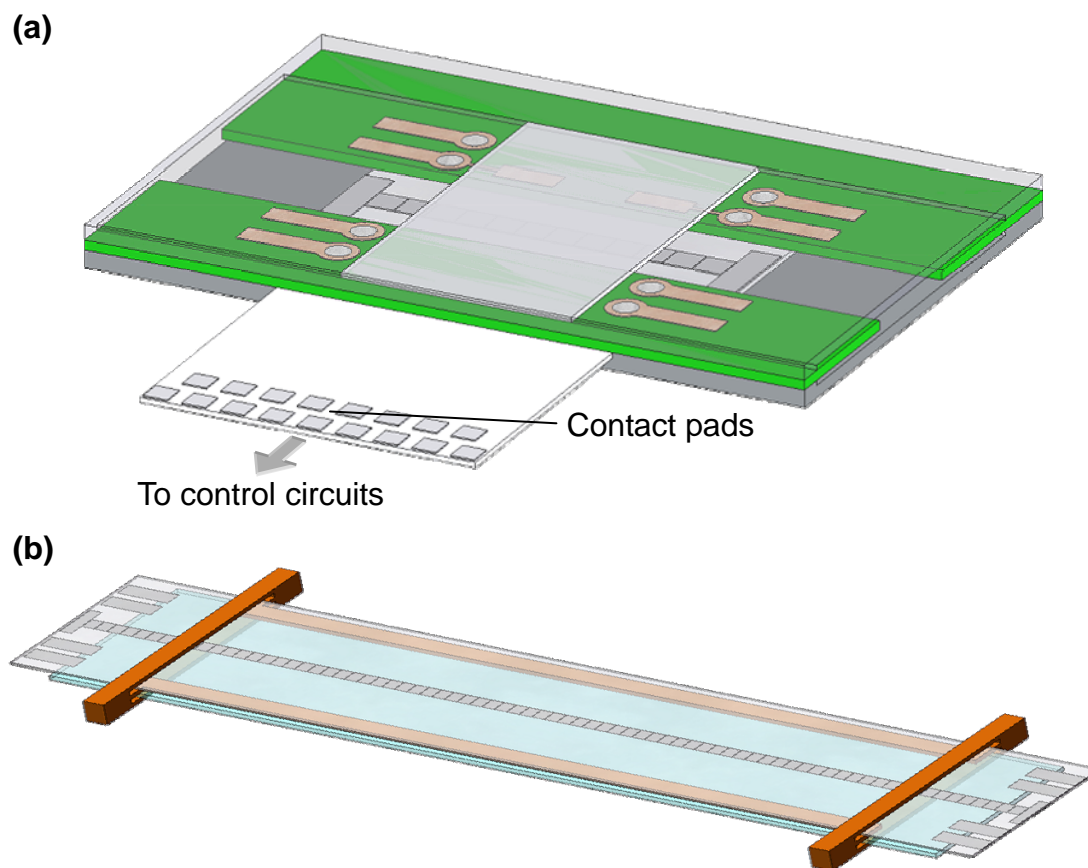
Sketch of the assembled modules. (a) Module 1. (b) Module II and IV.
